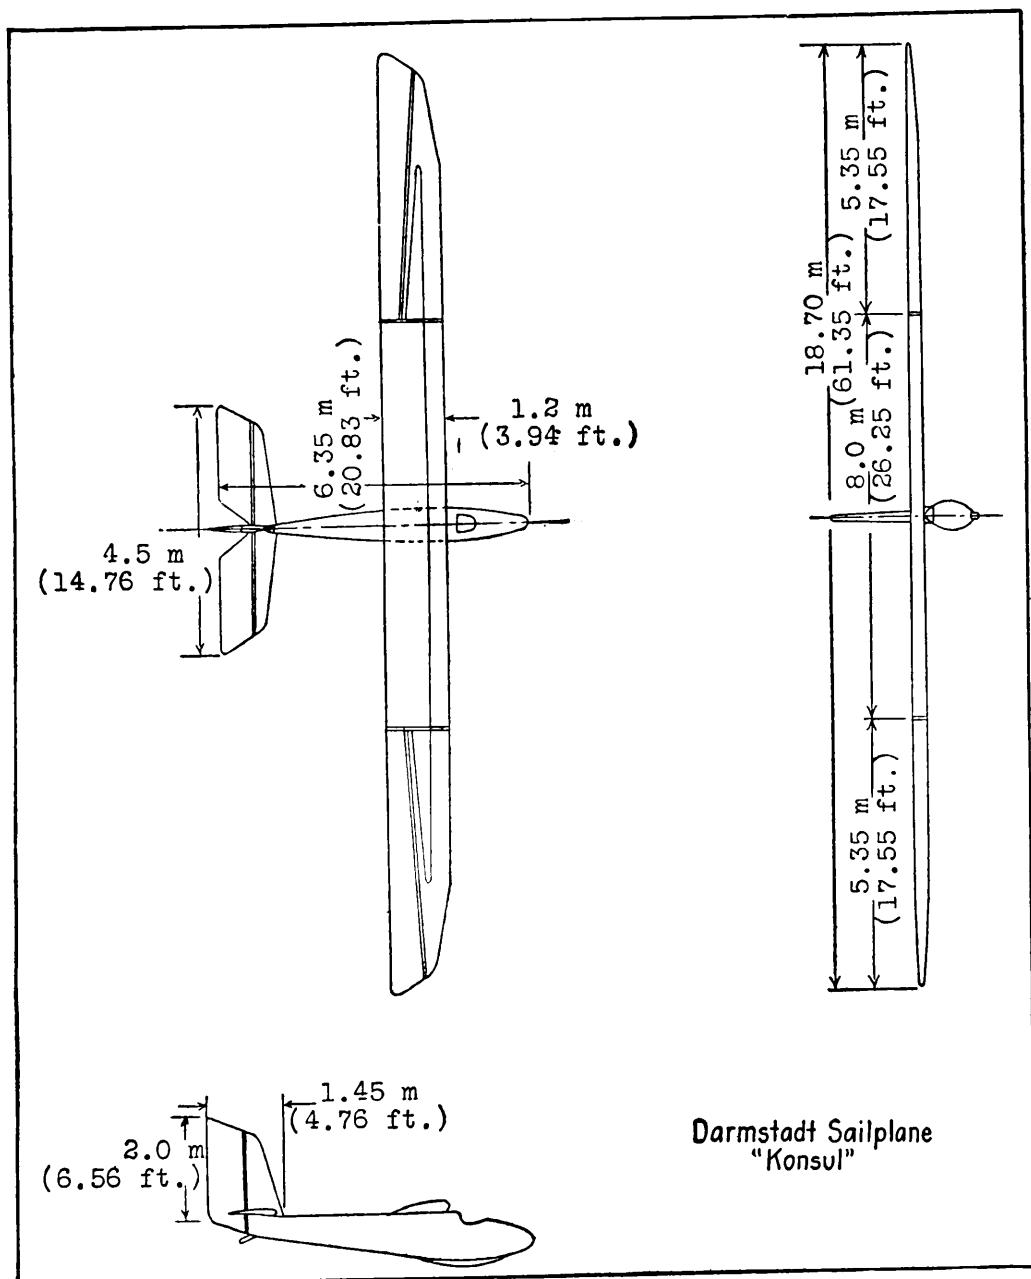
Side, Plan and Front Views of the Darmstadt Sailplane "Konsul."
